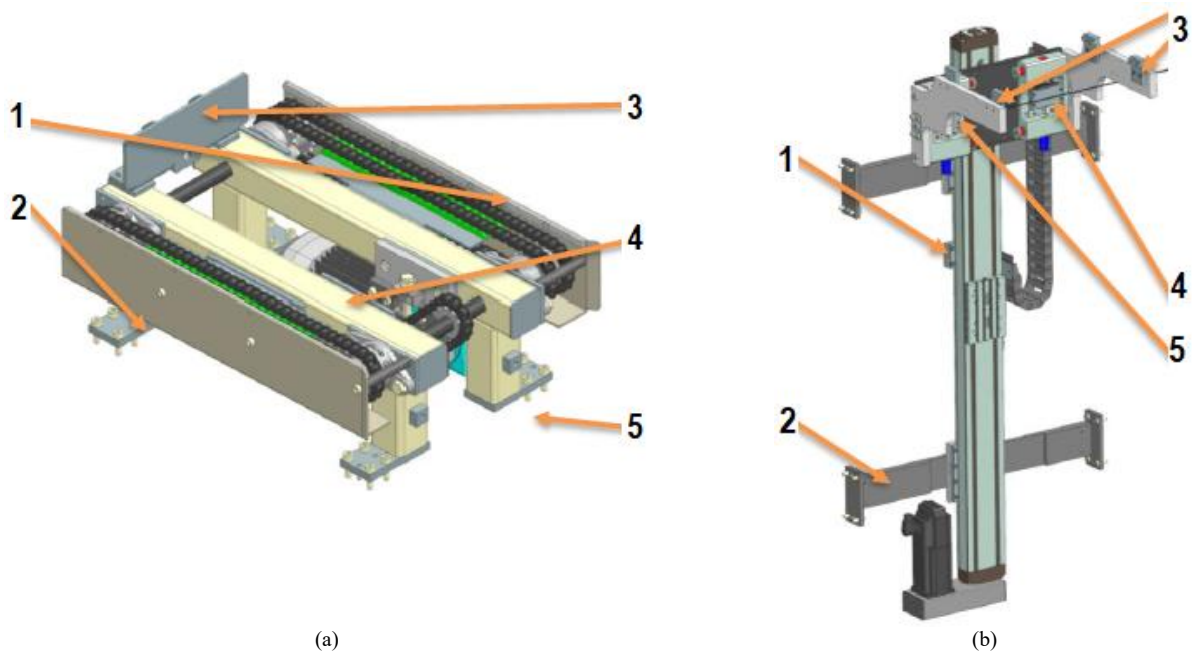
Outfeed chain conveyor (a) 1, 2 – guide rails, 3 – stop, 4 – drive, 5 – frame; and handling lifting unit (b) 1 – Bosch Rexroth linear servo axis, 2 – frame, 3 – gripping arms, 4, 5 – pneumatic cylinders.
